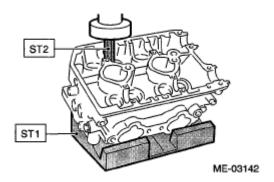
Removing Valve And Valve Spring Courtesy of SUBARU OF AMERICA, INC.
